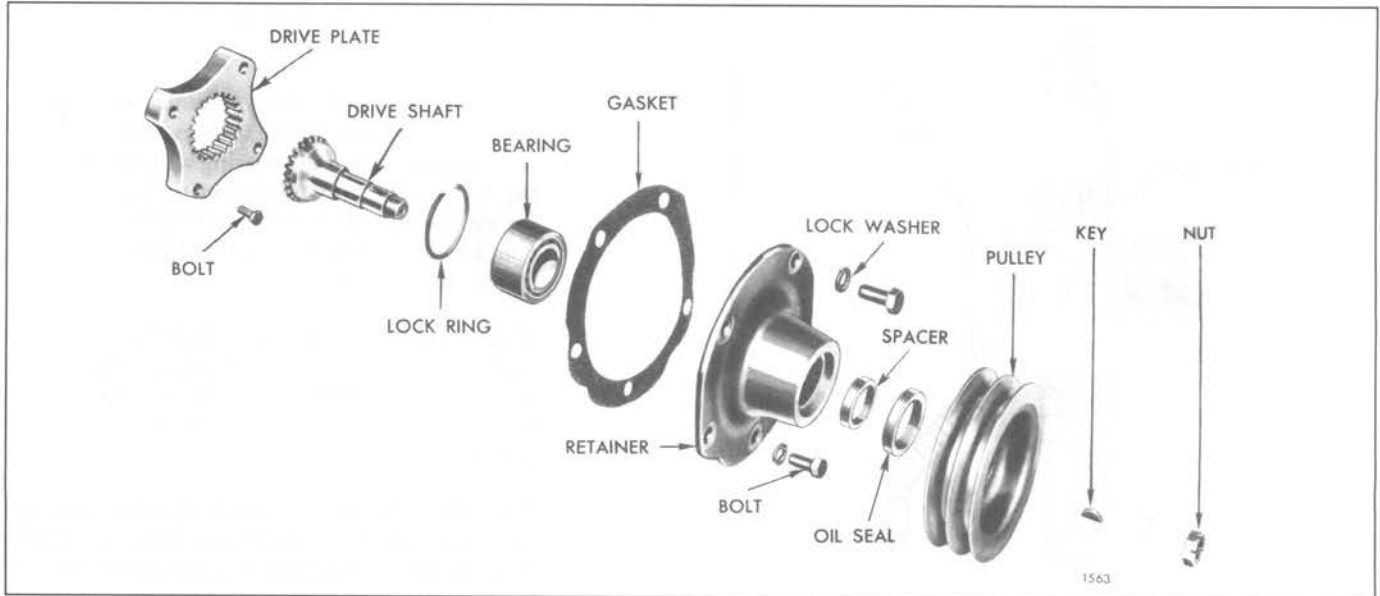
Components of Accessory Drive for Belt-Driven Accessory (Drive Plate Type)
